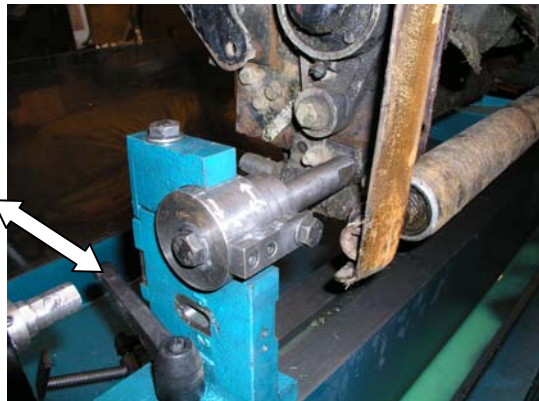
Adjustable mounting bracket located in the side of the mower frame
